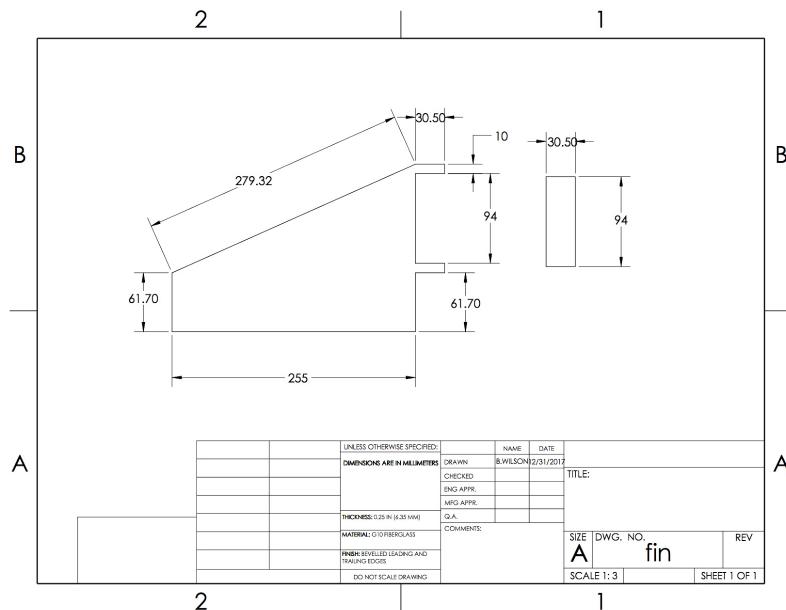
Drawing specifying the dimensions of the rocket fins and control surfaces.
